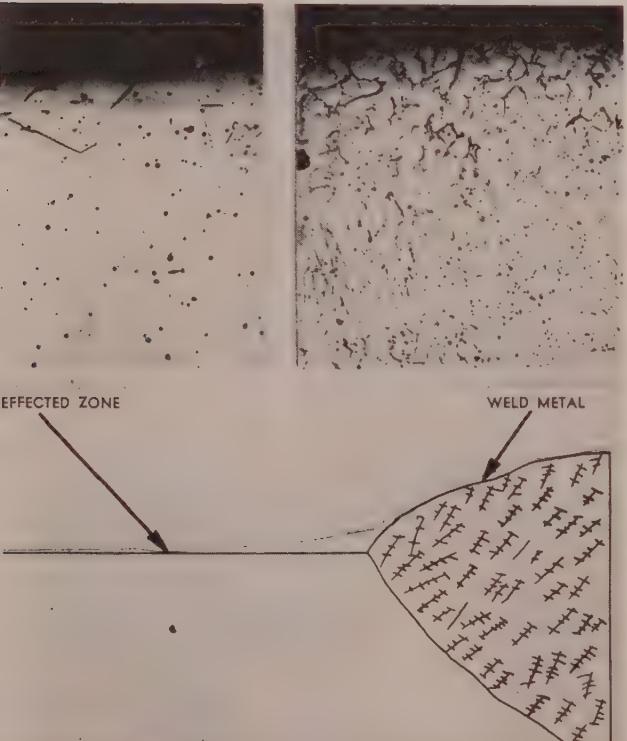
Butt weld made with  $\frac{1}{2}$ -inch type 347 plate and welded with type 308 extra low carbon electrodes. Compare with Fig. 3
